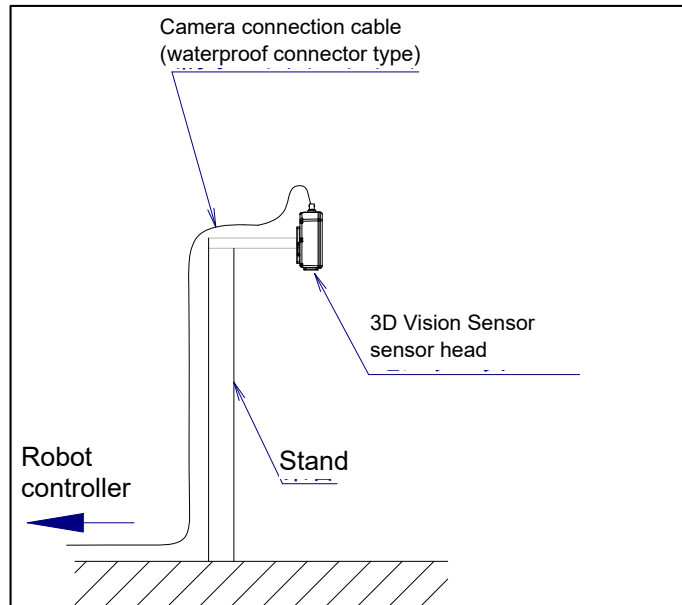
(b) Wiring of the 3D Vision Sensor (fixed camera)
